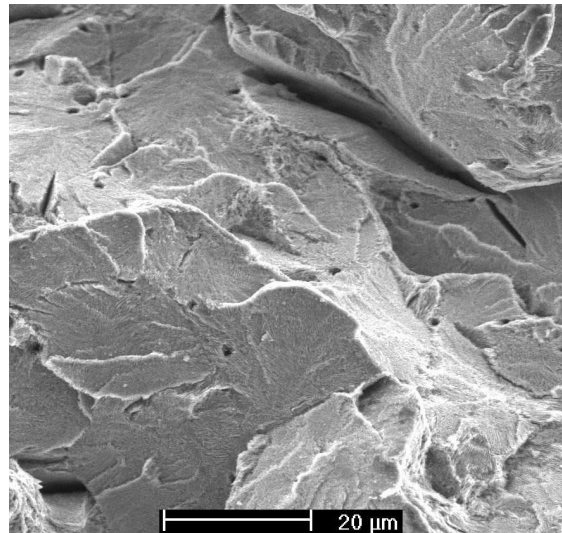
(b) - FF (cleavage) observed within a rock bolt fracture surface
